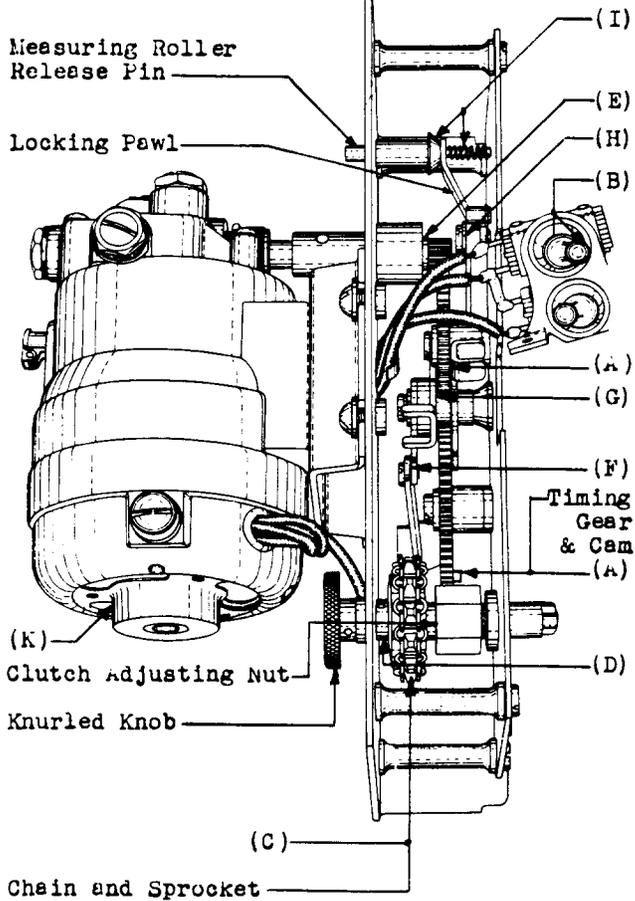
KS-8320 Camera - Motor Drive Unit
